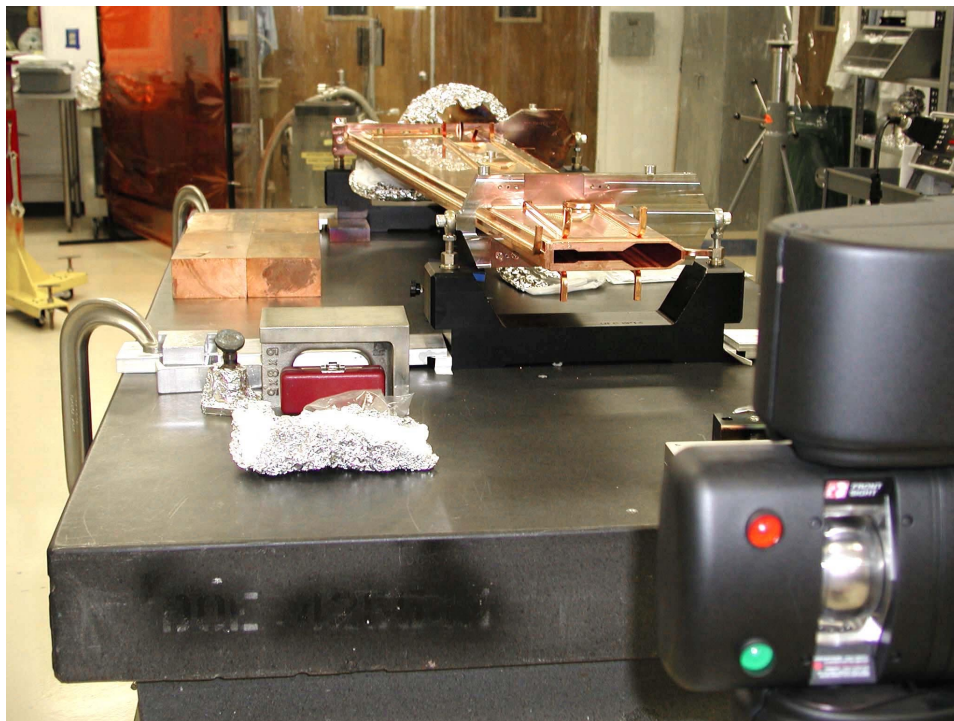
Slot profile measurement and fiducialization of the chamber after welding.
